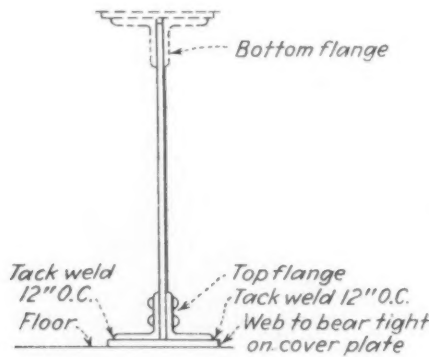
Procedure in assembling the machined edge of a web plate with the flange angles and plate.
